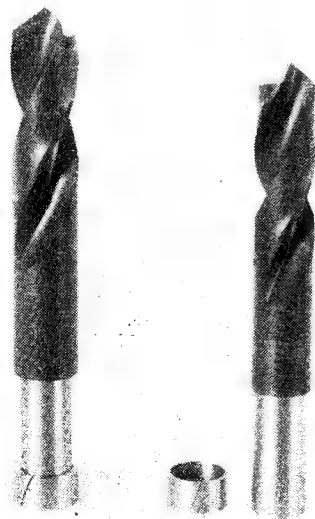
A $\frac{7}{16}$ in. dia. and a $\frac{1}{2}$ in. dia. stub drill with machined shanks and removable collars for jig grinding
